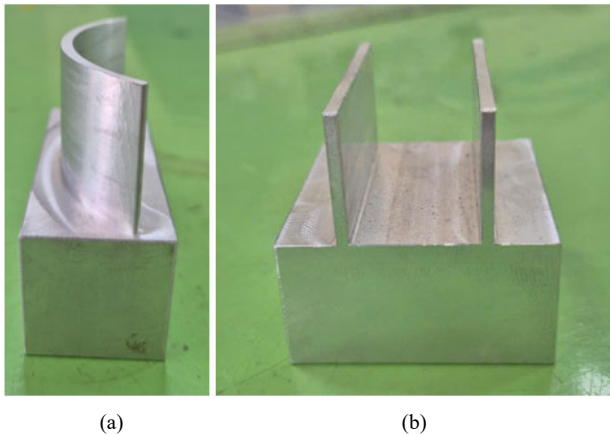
Irregular (a) and thin-walled (b) workpieces.
